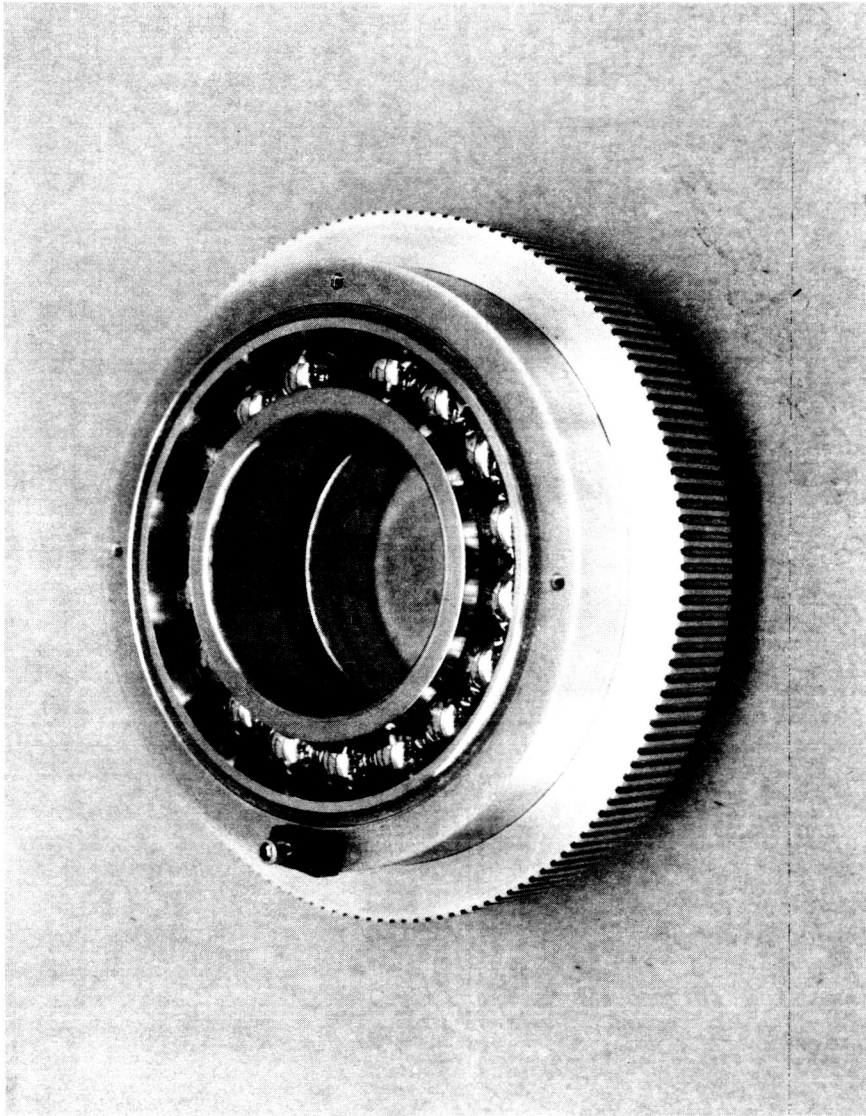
Assembled 40 mm test bearing with 17 grade 10 balls.
